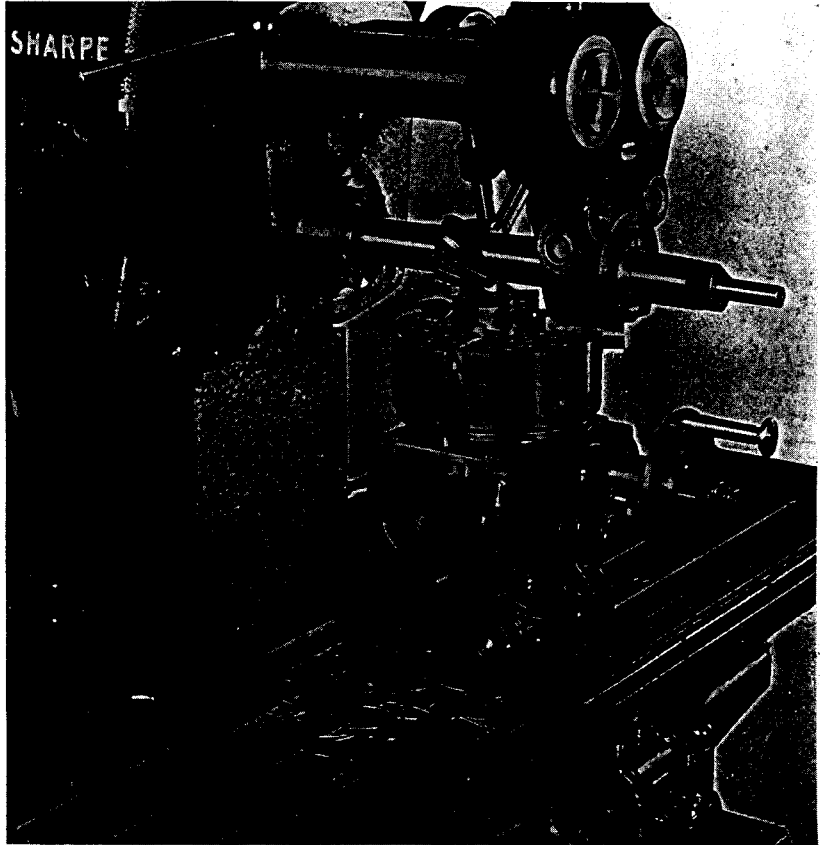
A typical rotary milling job using a No. 0 Universal Milling Attachment and 18" Rotary Attachment. The work is located radially by a special stud in the center of the Rotary Attachment table and is held by the vise as illustrated.
